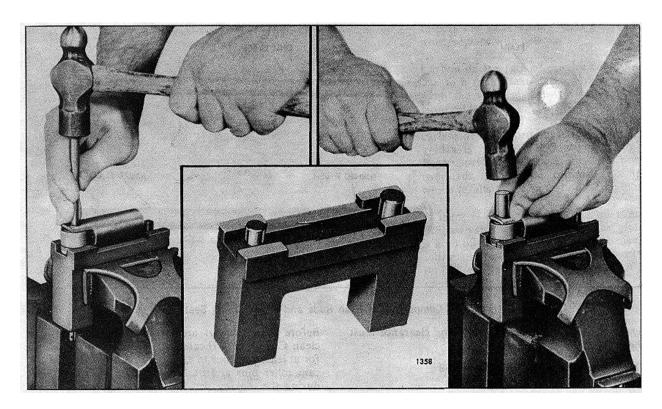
Removing or Installing Cam Follower Roller and Pin
